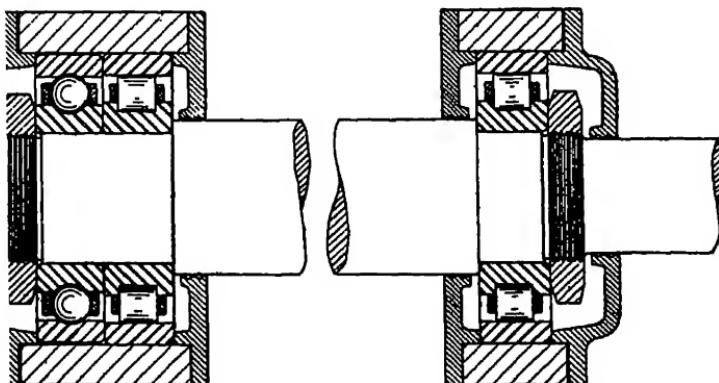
SHOWING THE USE OF A LOCATING BALL BEARING
